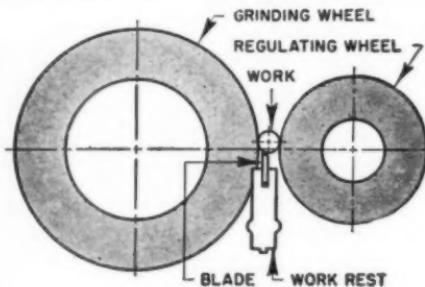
Above. Elements of the centerless machine. Fig. 17. Right. Top view sketch of thru feed set-up.
